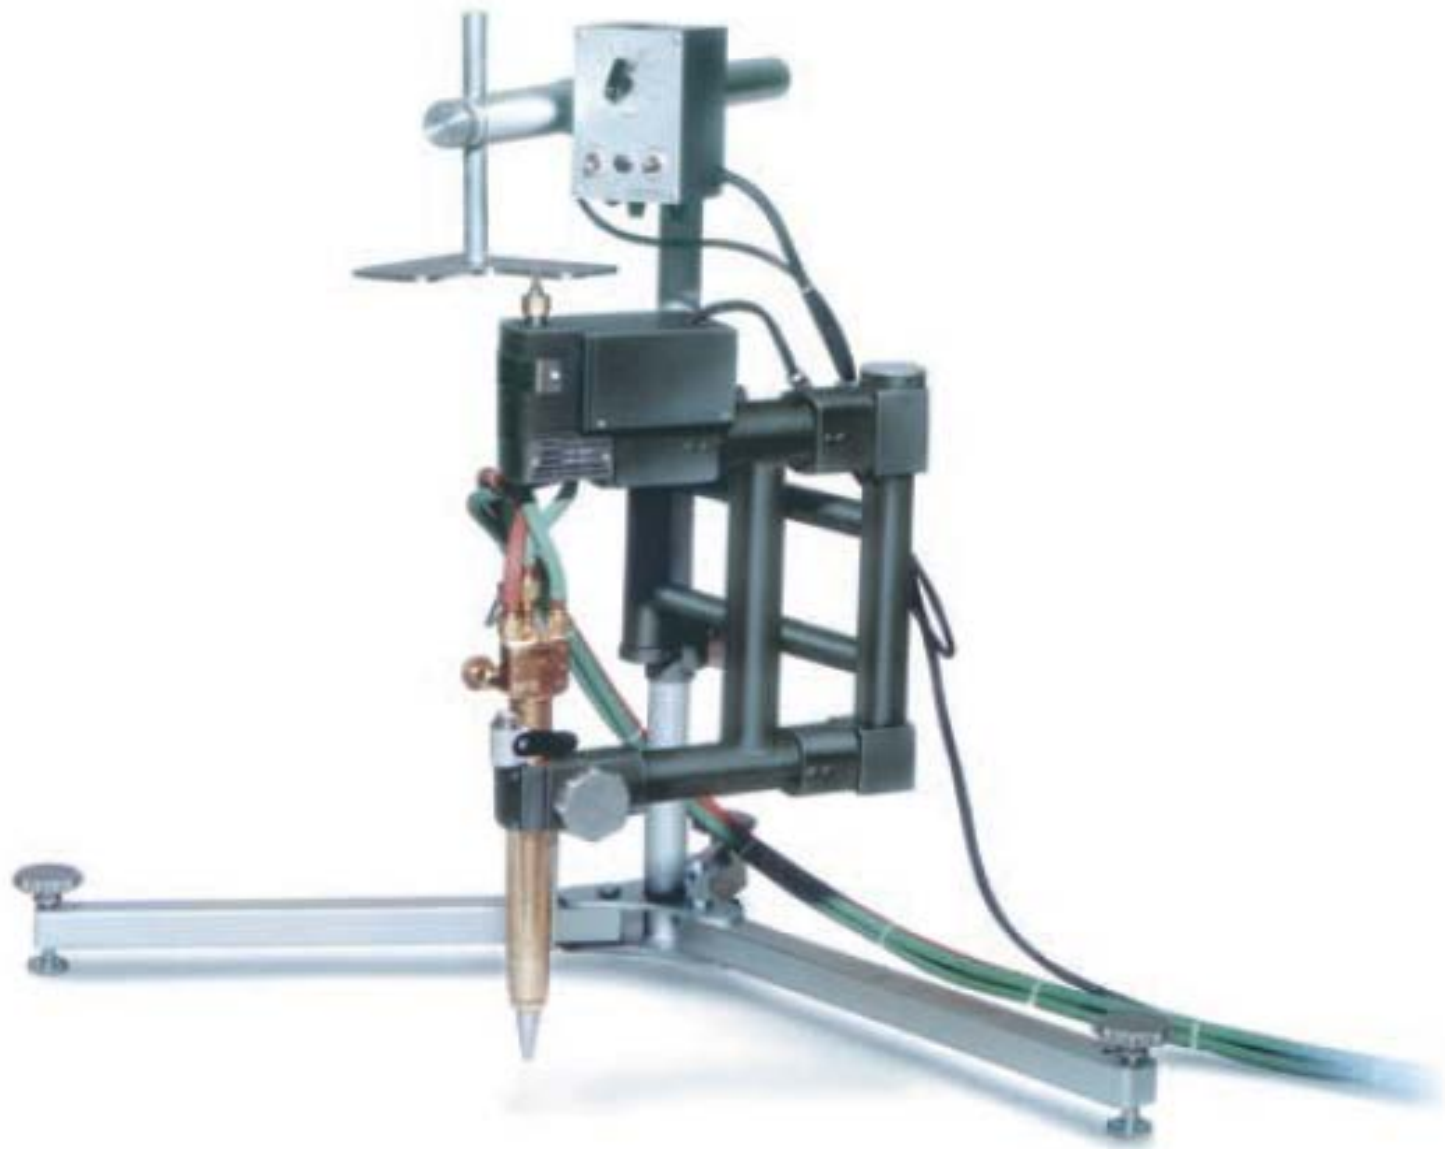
Portable cutting machine for highly complex shapes. ESAB Welding & Cutting Products
